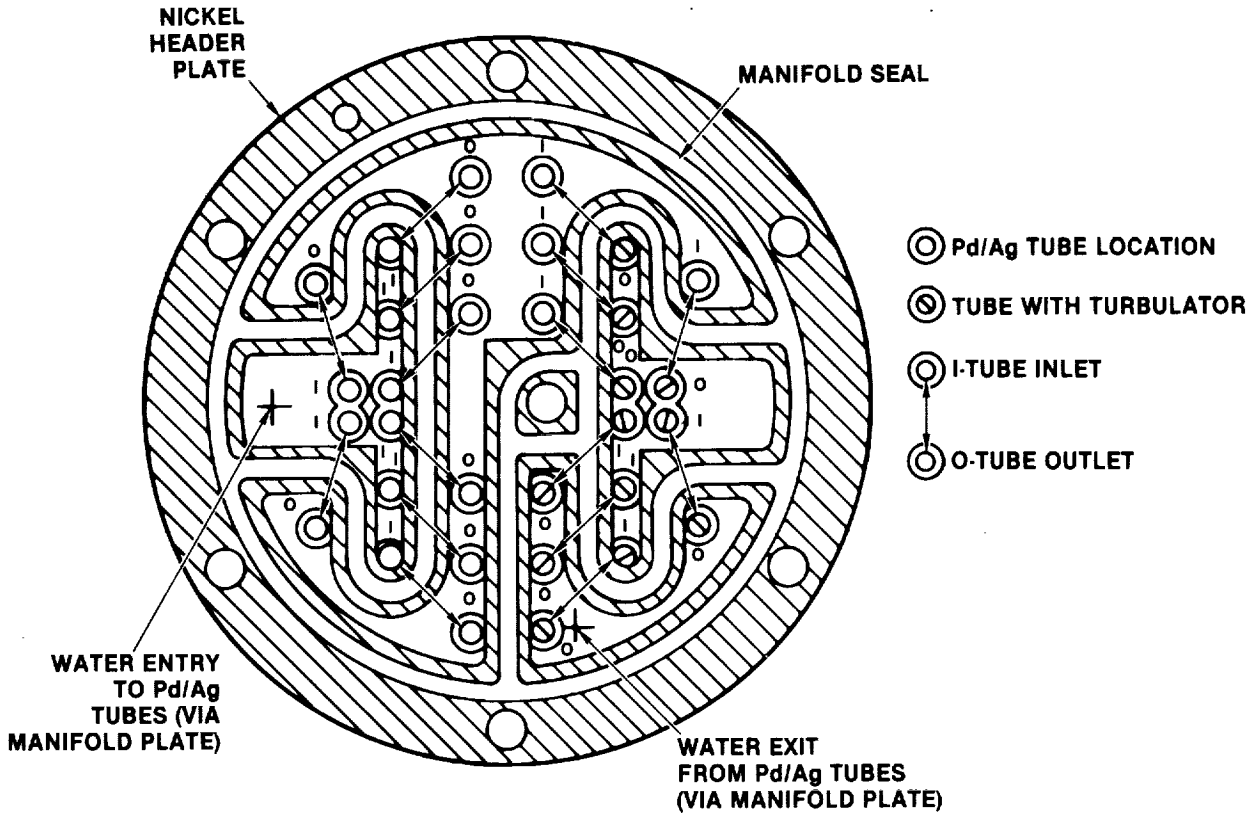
HEAD PLATE SHOWING Pd/Ag TUBE LOCATIONS AND MANIFOLD SEAL CONFIGURATION
